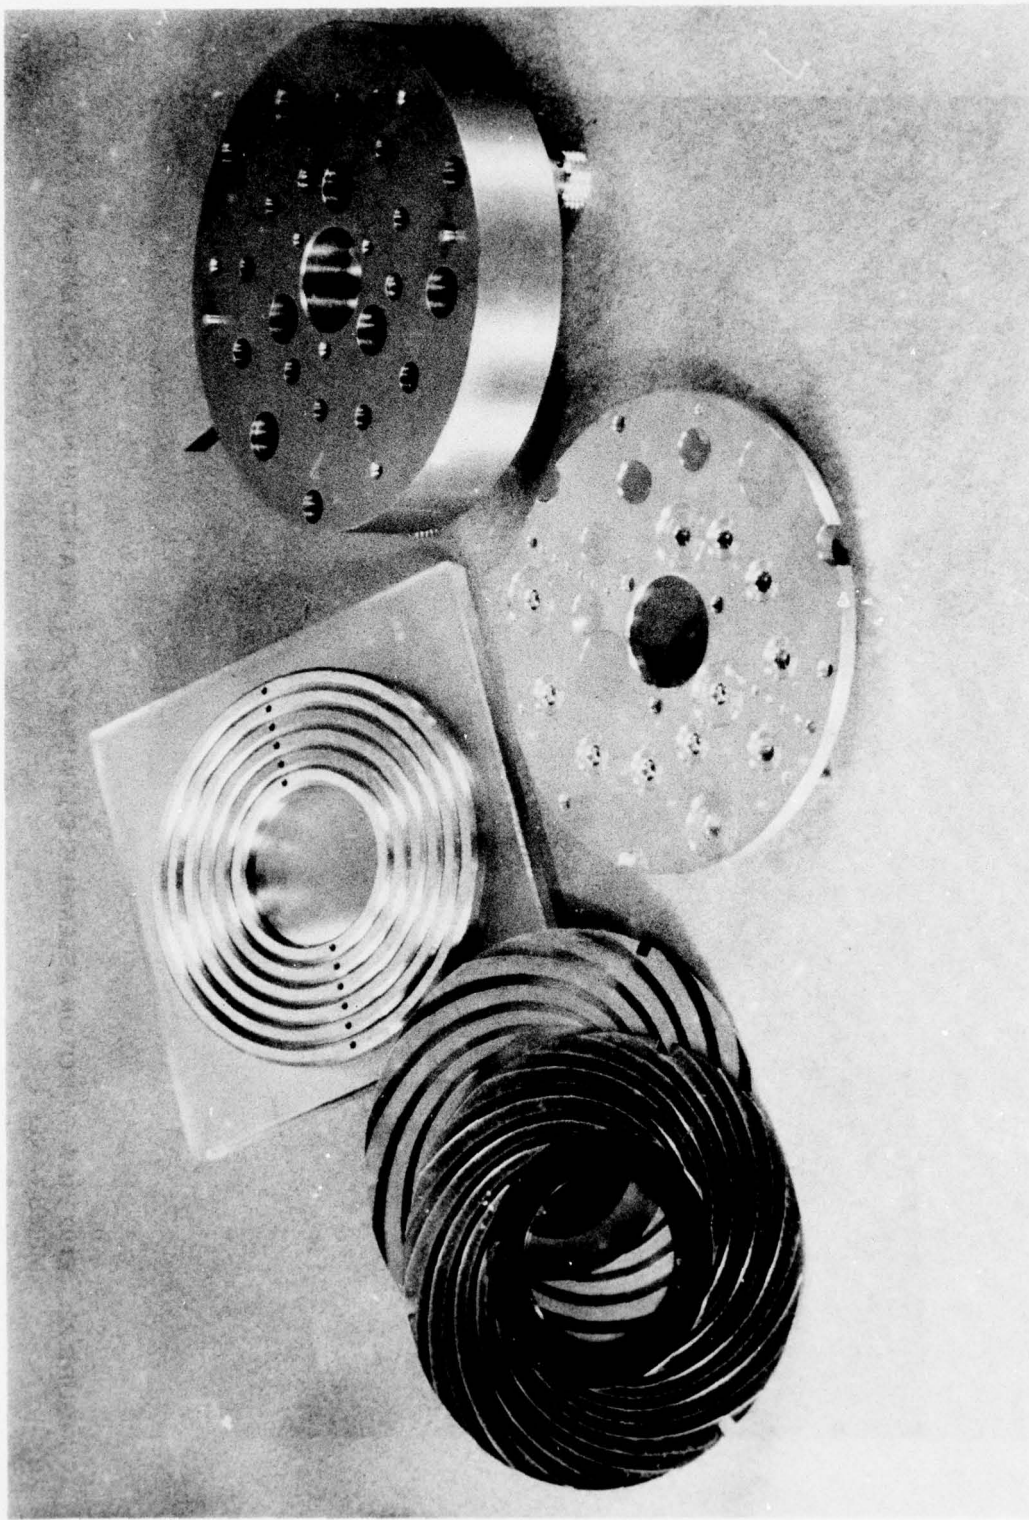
VIEW OF COMPONENTS OF FLEXIBLE THRUST BEARING LLF-1T. - SUPPORT PLATE (RIGHT), CAGE WITH BALLS AND SPRING PLATES (BOTTOM), RINGS (TOP) AND MEMBRANES (LEFT)
